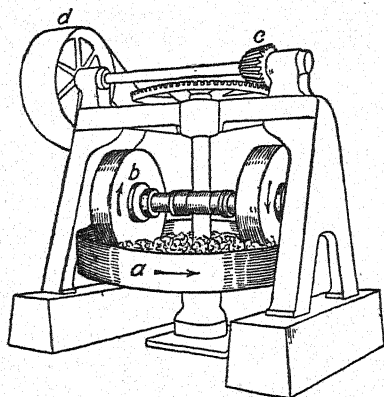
Dry or wet pan grinder. *a.* Pan. *b.* Grinding wheels with steel tires. *c.* Gear. *d.* Pulley. (Courtesy of International Clay Machinery Company.)
